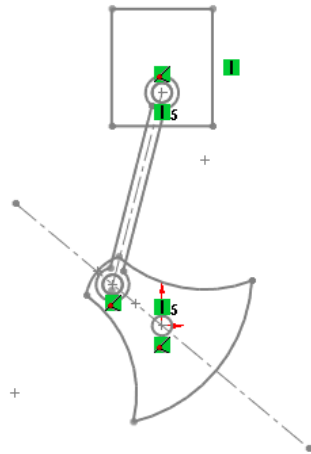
Reciprocating mechanism created by assembling the blocks
